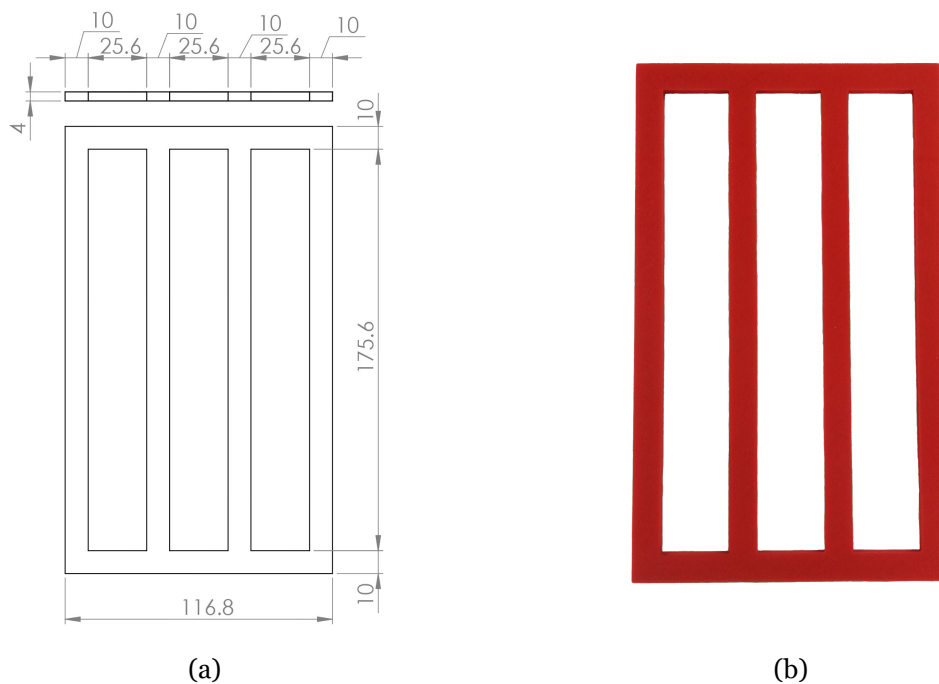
(a) Experimental curing structure for the manufacture of SLJ. Dimensions are in millimeters - front and top view (from top to bottom). (b) The final structure is PLA to support the curing of the SLJs.
